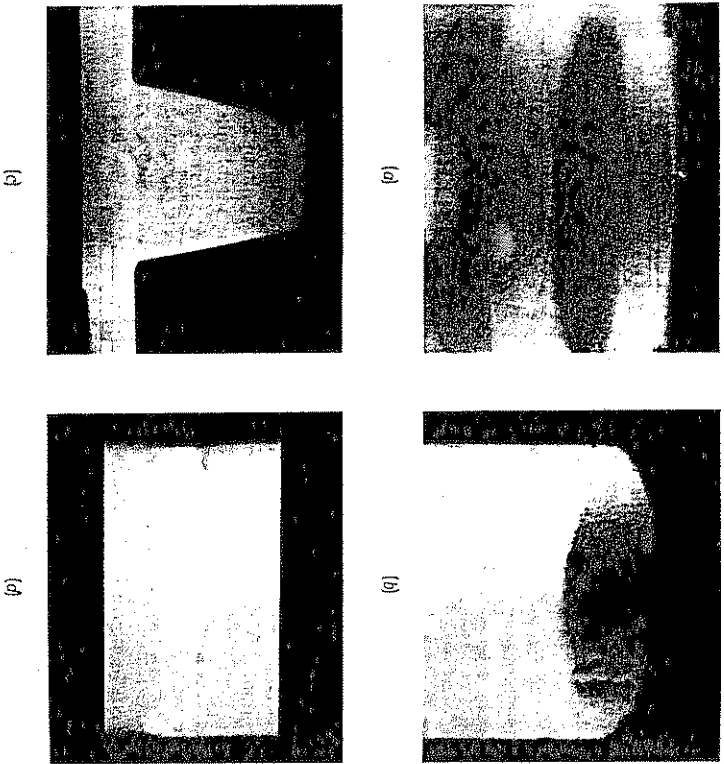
Radiographs of (a) crack and hydrogen porosity in a magnesium casting, (b) graphic corrosion of a cast iron pipe, (c) solidification shrinkage in an aluminum casting, and (d) incomplete penetration of a steel weld.
